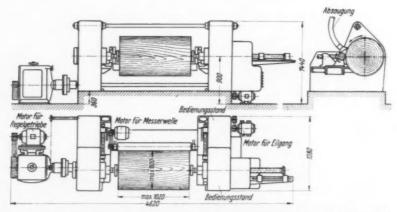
Diagrammatic illustration of the wood-shaving cutter built by A. Roller. This machine is based upon the lathe principle. The wood block is rotated between lathe centers. A knife cylinder operating at high speed moves slowly against the block and in doing so cuts shavings whose length is determined by the position of the scoring knives on the cylinder. Maximum length of wood block: 42-50 in. Power: 20 kw.
